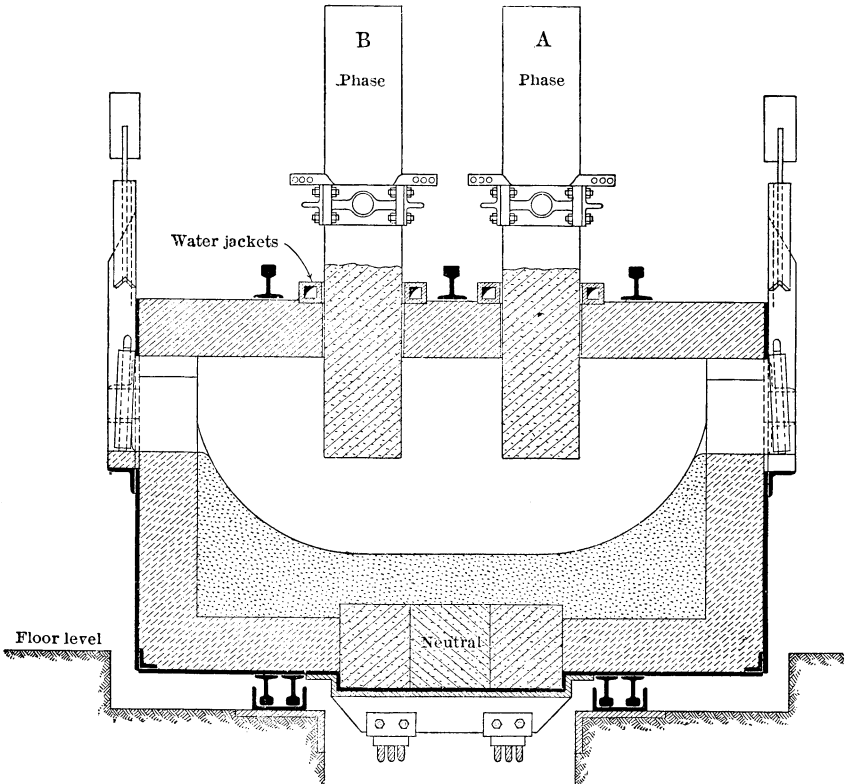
Longitudinal elevation of 2.5-ton, two-phase Grönwall steel furnace, Sheffield, England.
